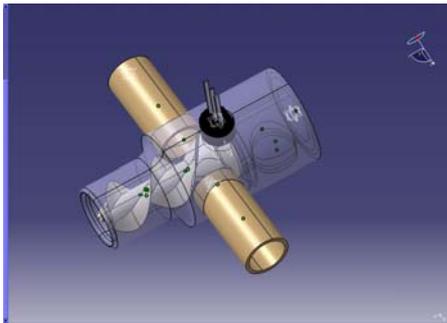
Drawing of the prototype with attached tubes and Hall sensor for the experimental set-up.
